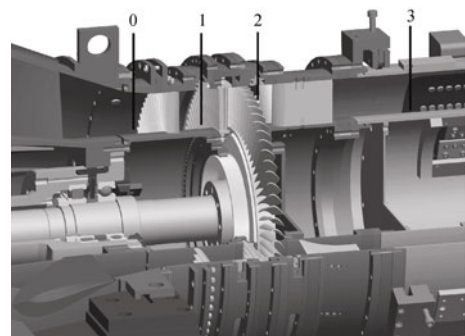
Sectional drawing of the test turbine, general arrangement; results described in the paper refer to plane 2.
